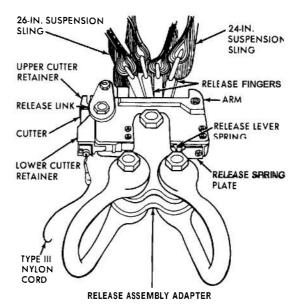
MULTIPLE RELEASE ASSEMBLY WITH ADAPTER, SLINGS, AND CUTTER INSTALLED
